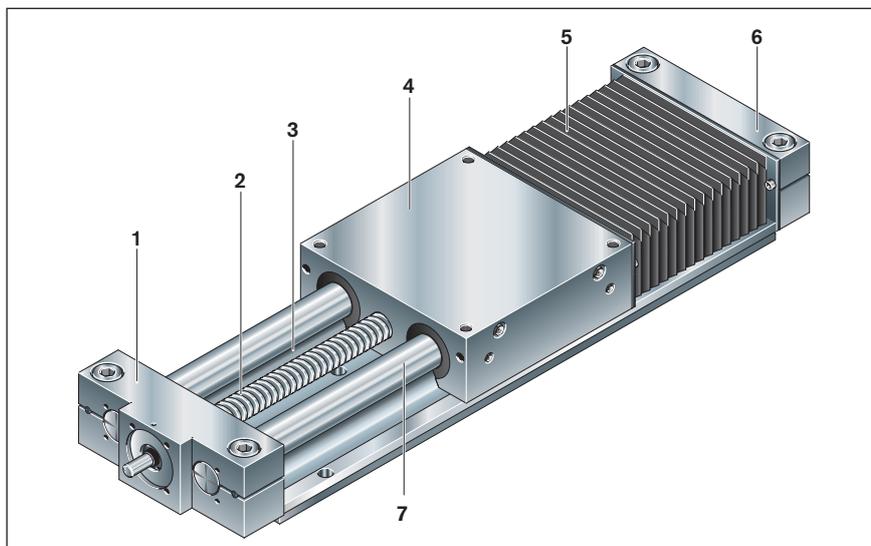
Components of the Linear Motion Slide with ball screw drive
